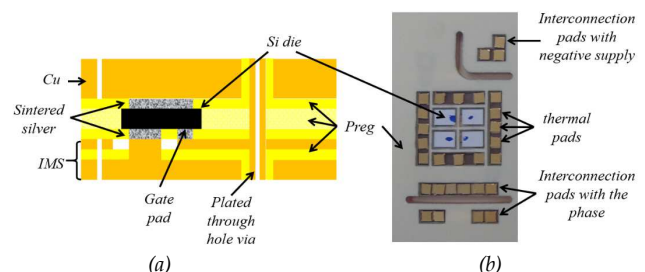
(a) vertical cross-section of the PCB Embedded assembly design (b) top view of the assembly before top IMS mounting
